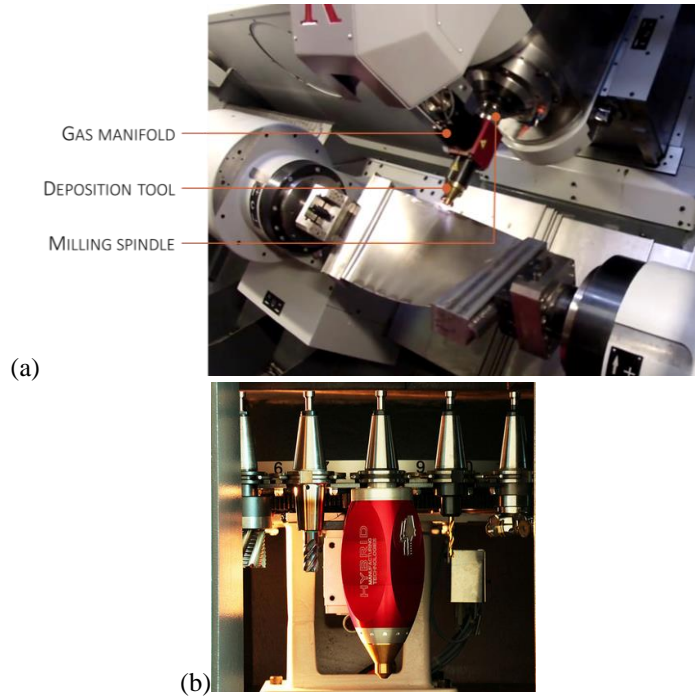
The retrofit system provided by Hybrid Manufacturing Technologies [60]: the system installed on a turn-milling machine (a) and the deposition tool (b).
